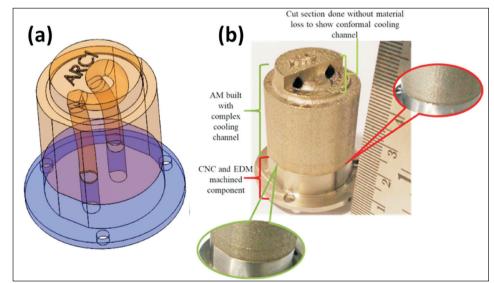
(a) Image representing 3D CAD model of hybrid core-pin and (b) shows the photographs of manufactured as-built hybrid core pin with both conventional and AM as-built sections.
